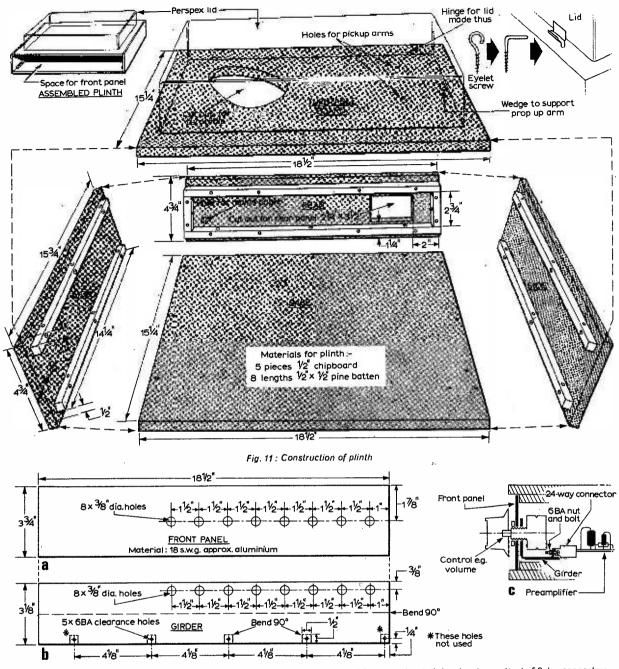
(a) : Front panel (front view). Fig. 12(b) : Girder. Fig. 12 (c) : Cross section of front panel and girder showing method of fixing connectors.
